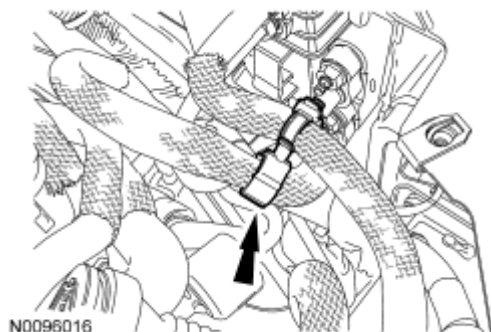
Locating Coolant Vent Hose Retaining Clip
